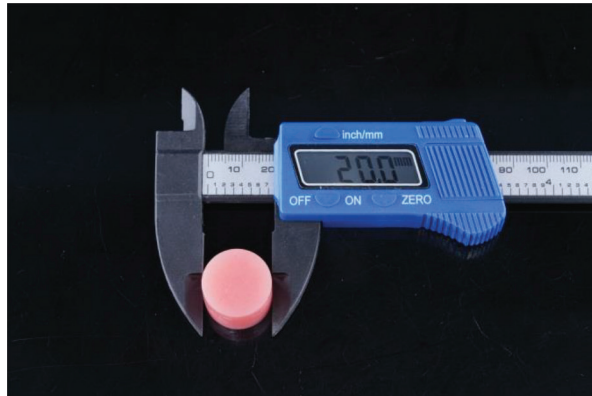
Milled acrylic resin, which was attached to pressure sensitive shaft of universal testing machine to detect compressive and tensile force, has a diameter of 20.0 ± 0.5 mm.
